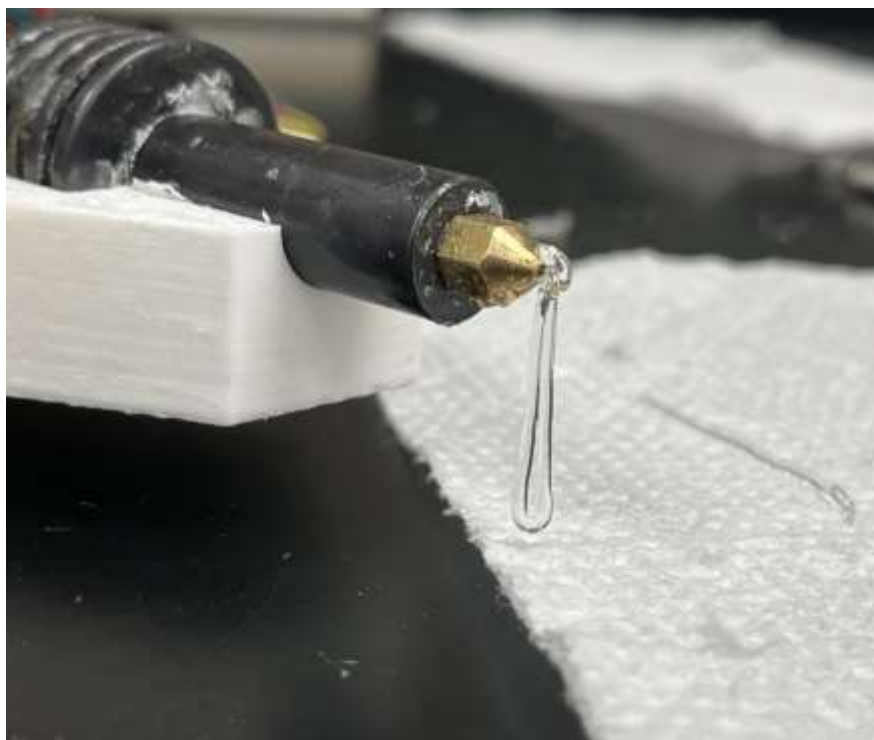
EC and slurry loaded with Silica maintaining structure despite hanging with no support.
